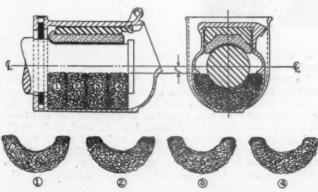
Roll method of packing boxes-No: 4 roll sized to fill without additional small piece
